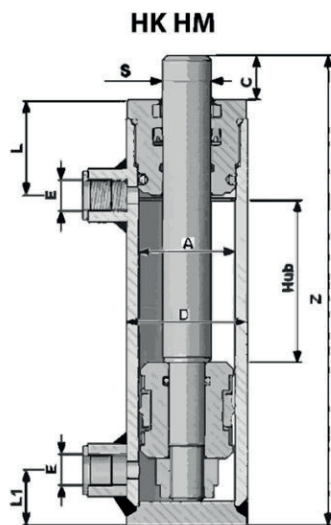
The principle of the cylinder design with internal face assembly, welded bottom and oil fittings directly connected to the cylinder tube [6]
